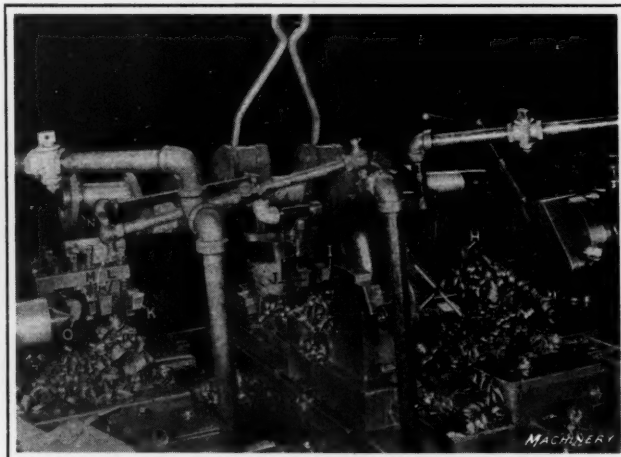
Double-carriage Lathe equipped with Seven Tools for simultaneously filleting Line Bearings, straddle-facing Flange, and turning Oil Sling
